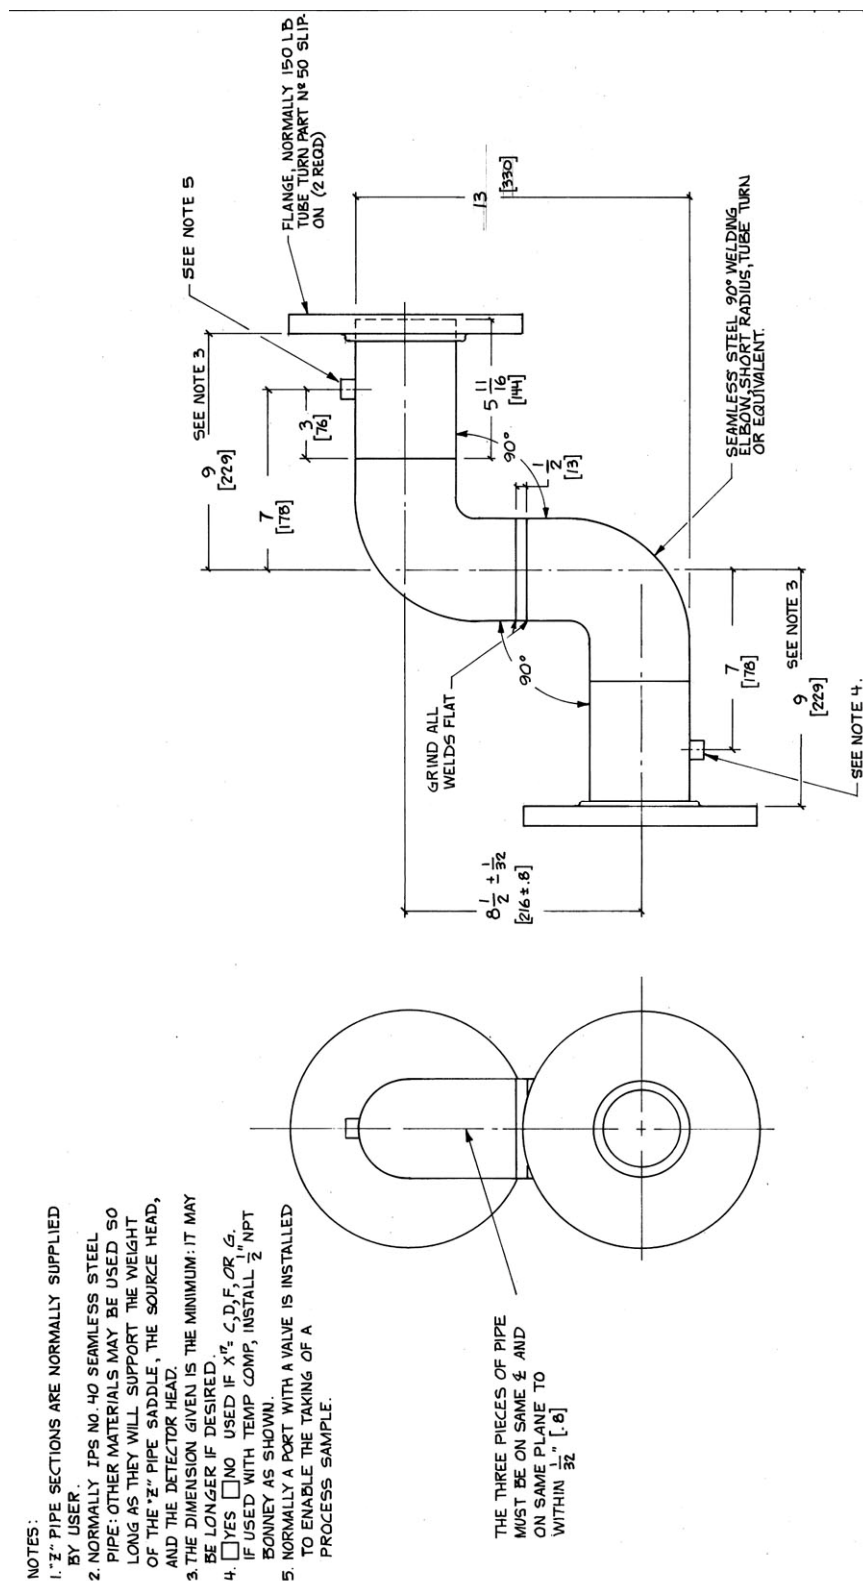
864163: Fabrication details, 4" Z-pipe section (sheet 1 of 1)
